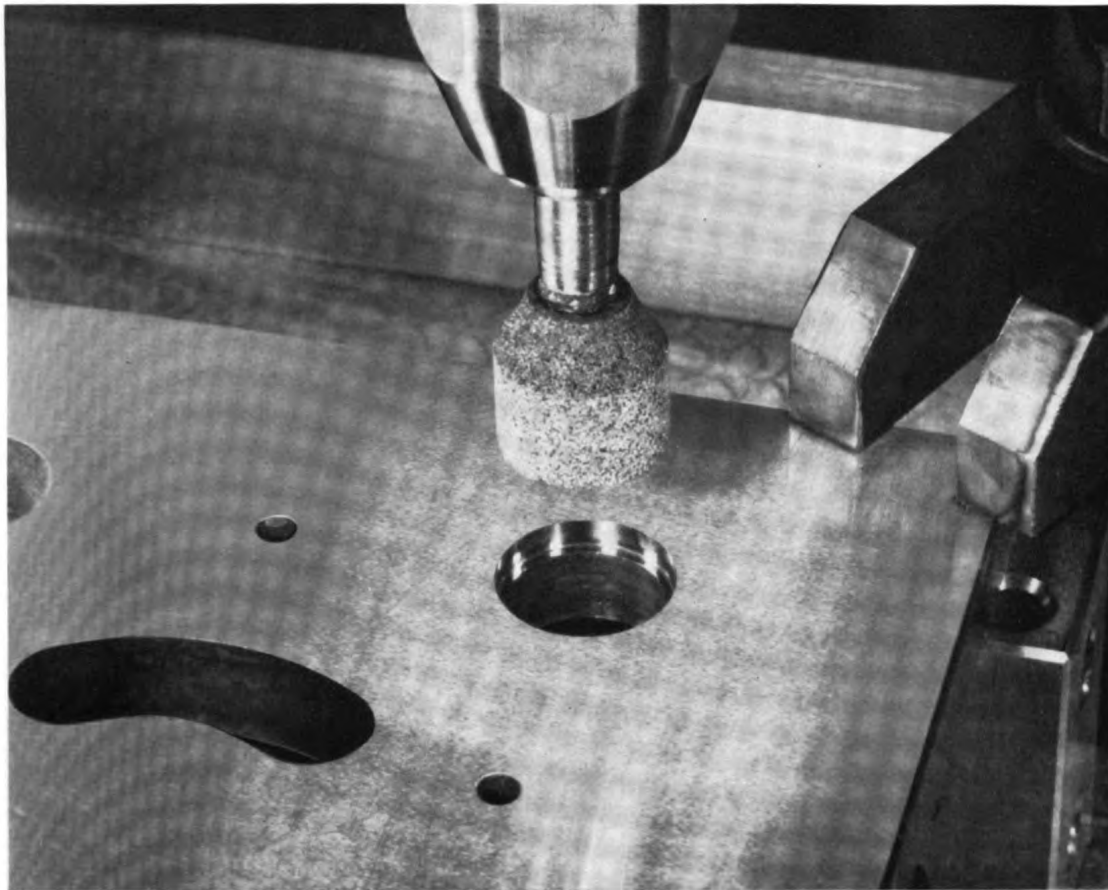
Plunge grinding to increase diameter of a hole by  $\frac{1}{16}$ " in one cut, using the 1 hp grinding head and a  $\frac{3}{8}$ " shank diameter wheel.
